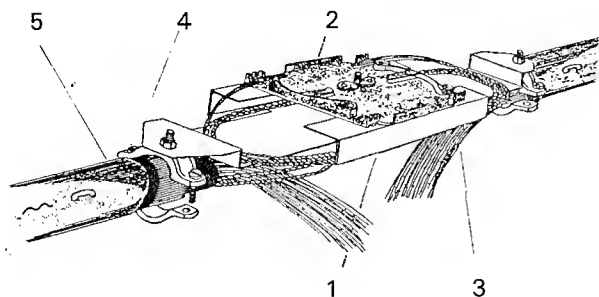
Jointing sleeve for hybrid cable consisting of copper and optical fibre elements
